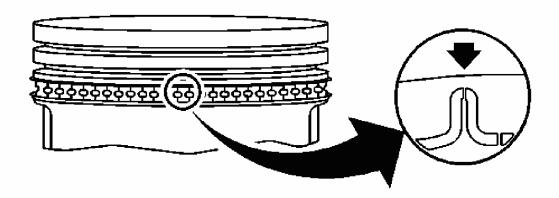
View Of Lower Oil Control Piston Ring Spacer Courtesy of GENERAL MOTORS CORP.
